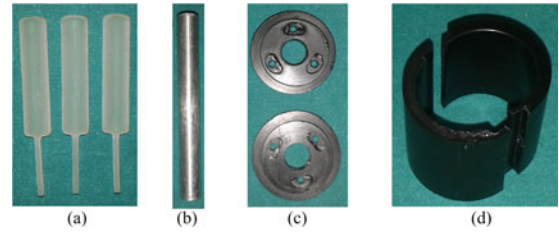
Components of the mold used for the fabrication of the silicone structure of the module. (a) and (b) Molds for the fluidic chambers and for the stiffening chamber, respectively. (c) Two caps of the mold. (d) Two shells closing the mold.
